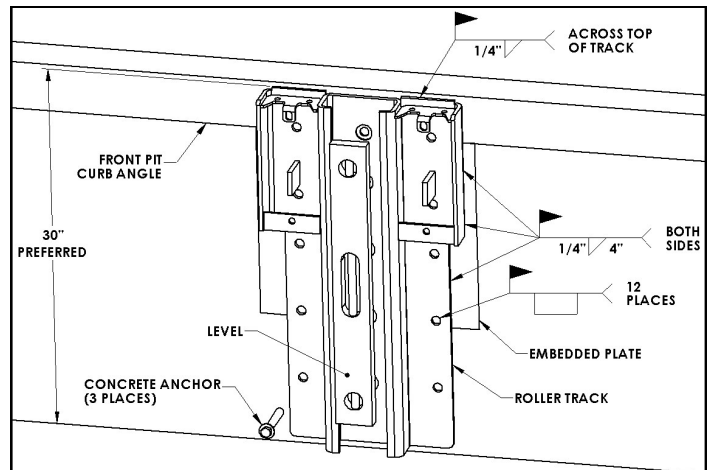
FIGURE C—WELDING ROLLER TRACK FRONT VIEW (WITH EMBEDDED PLATE)
